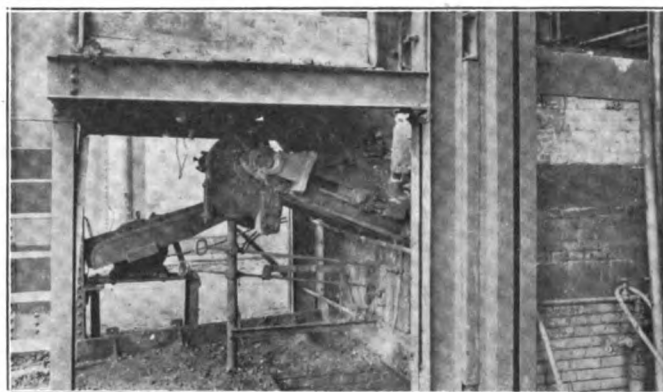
View showing stoker applied to billet heating furnace—Spang Chalfant Company, Pittsburgh, Pa.
